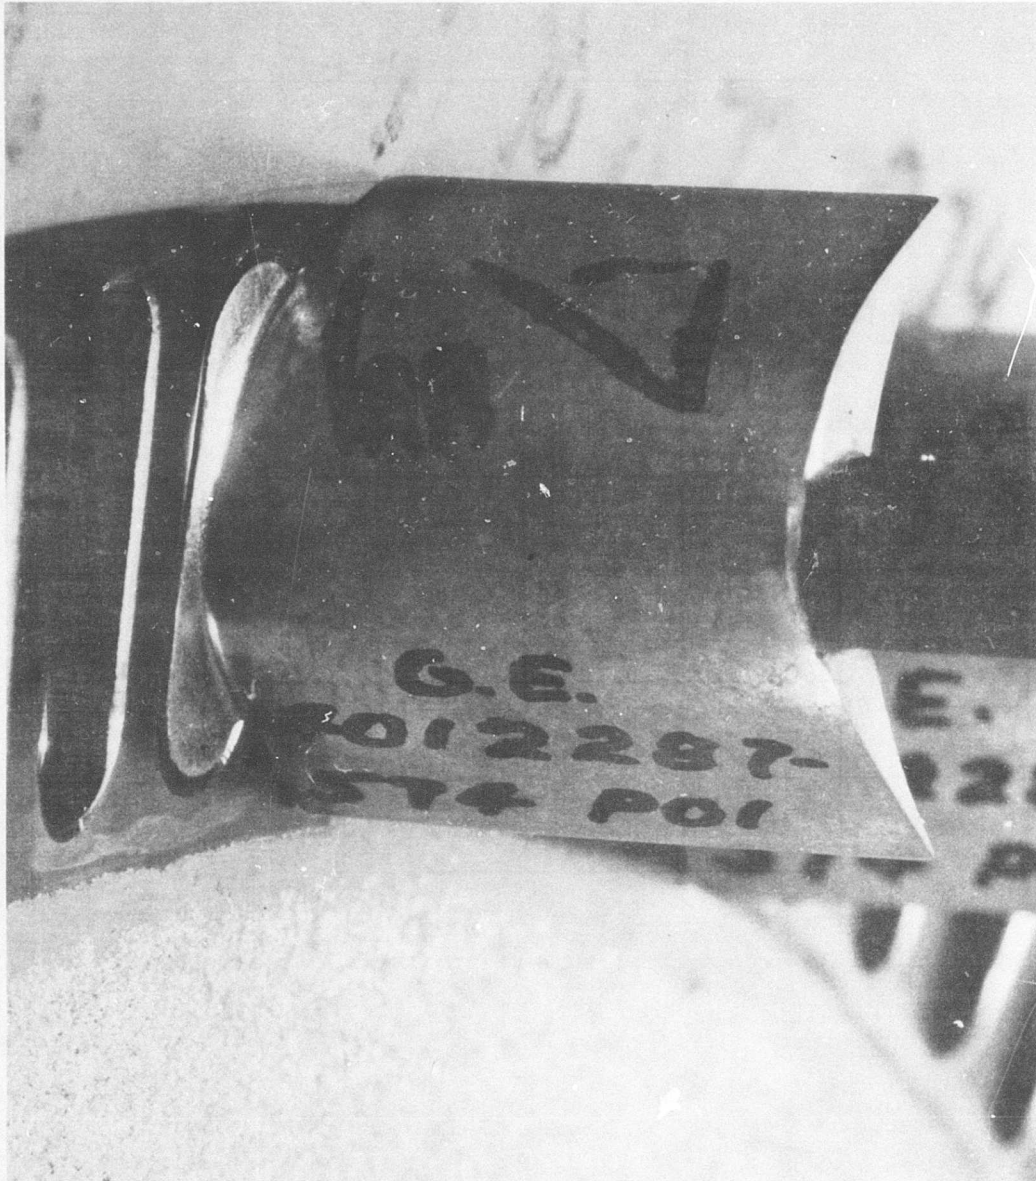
Close-up of Long Shank Rotor Blade Seated in Rotor Disc.
